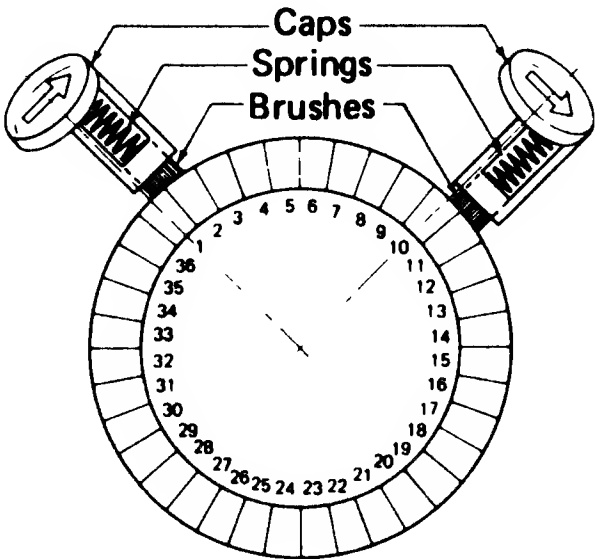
The position of the frame in Fig. 2-48 reversed. This will cause the motor to run in the opposite direction.
